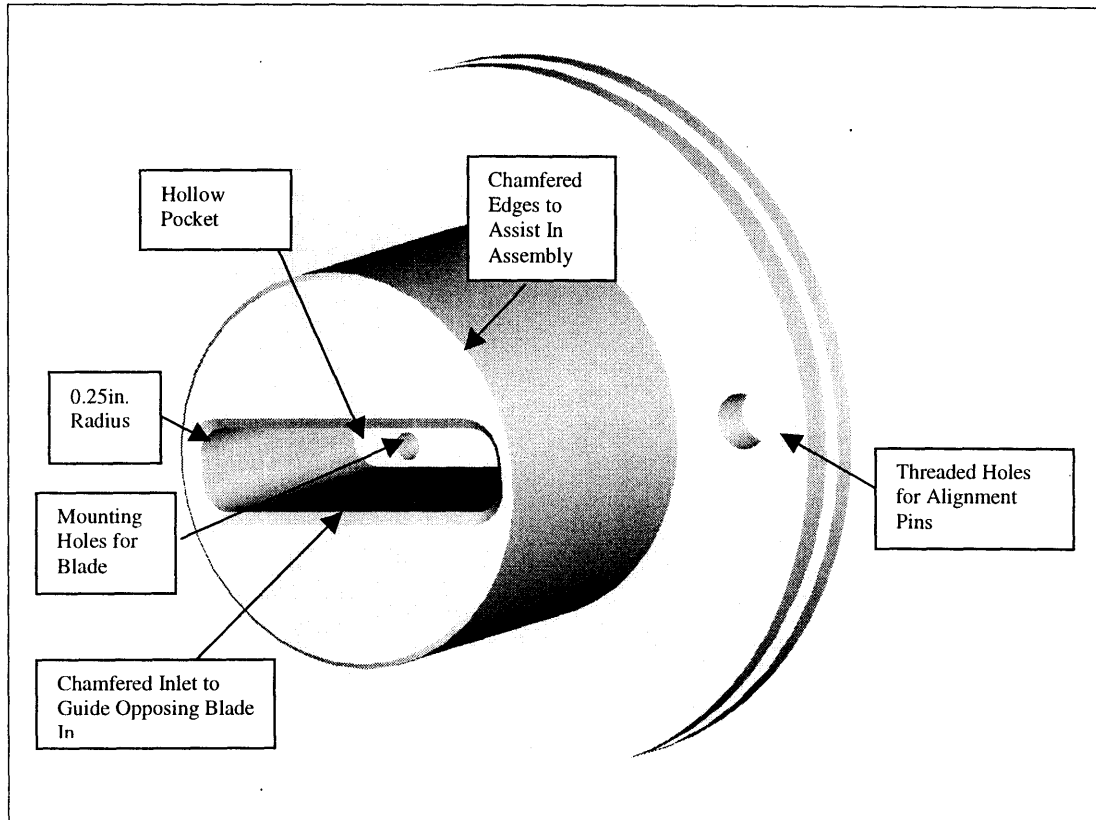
Original piston design with square pocket for cutting blades.
